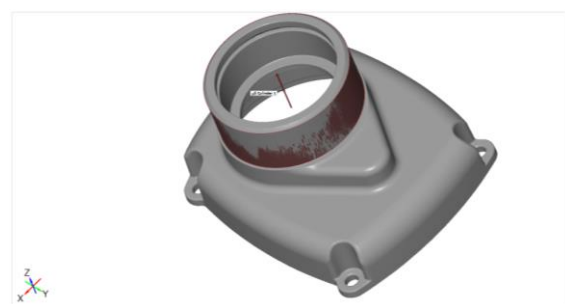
Creating a cylindrical surface on the surface of the mixer casting diameter [GOM GmgH]
